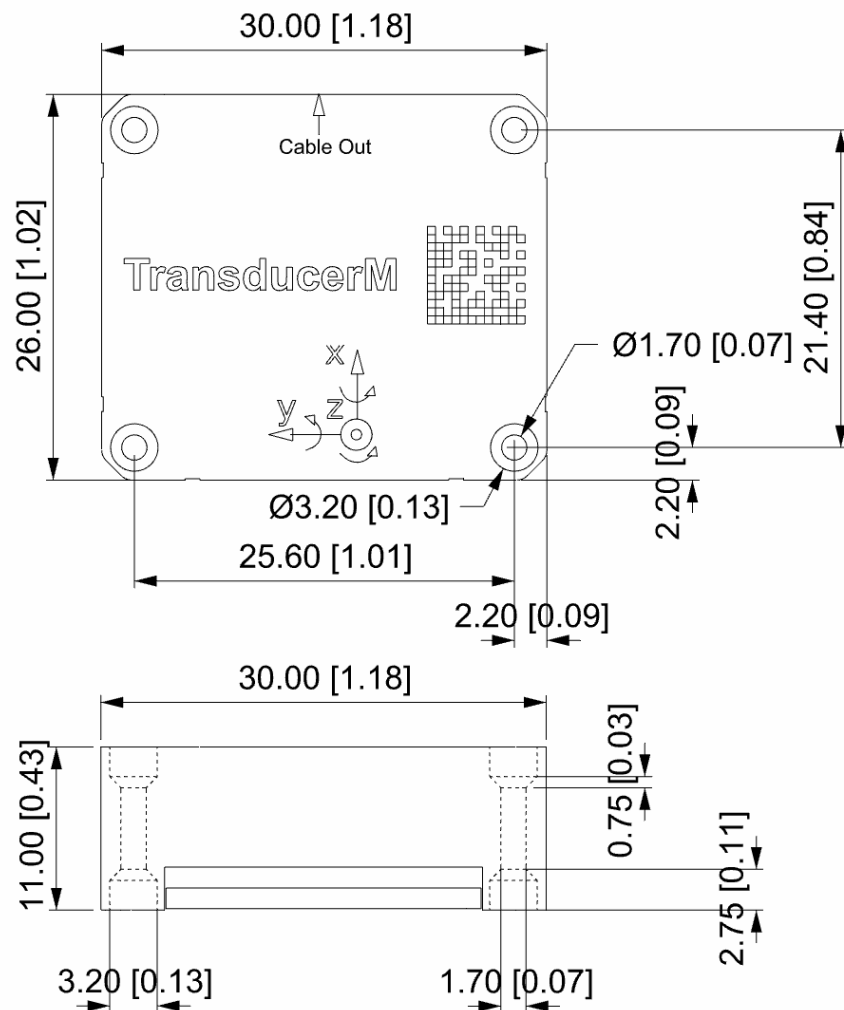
TransducerM TM421 Mechanical Drawing and Axis Definition
